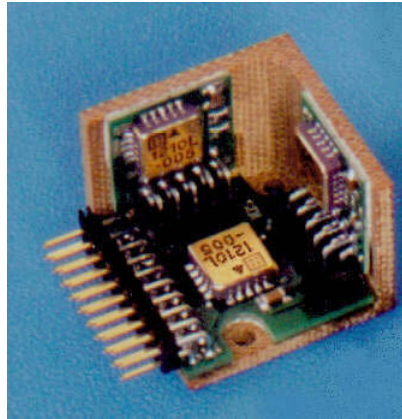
Three-axes, open frame accelerometer assembly. The picture does not show an opened module of the same type as incorporated in CoPilot® but one with similar internal locations of the single-axis accelerometers.^[21]
